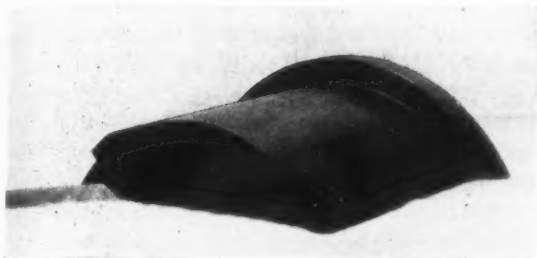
Keys molded on the back of the bearing fit into suitable milled grooves
